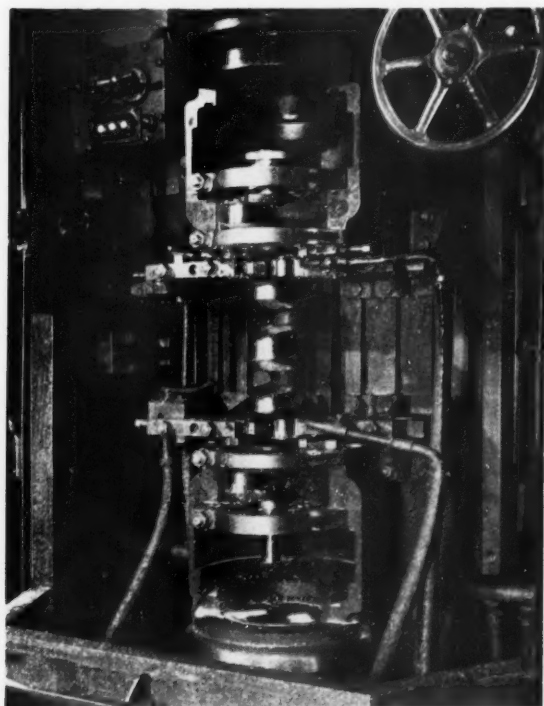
A crankshaft in one of the machines shown in Fig. 10
